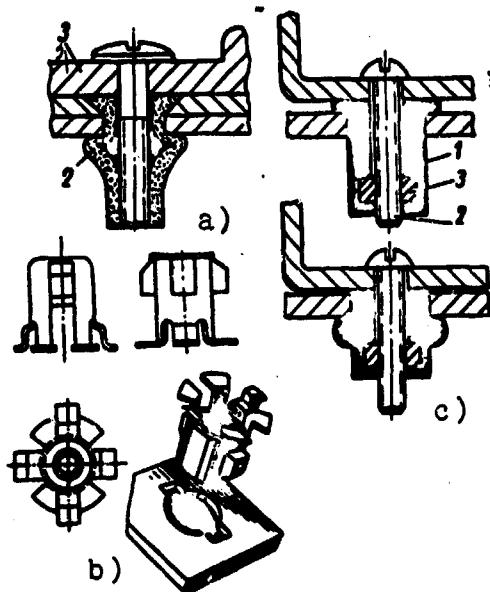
Glued-screw couplings of parts by attachment with one-sided approach: a) connection with a metallic bushing and standard screw; b) with bolt-bushing (bayonet) with tongues; c) with bush and standard screw.
